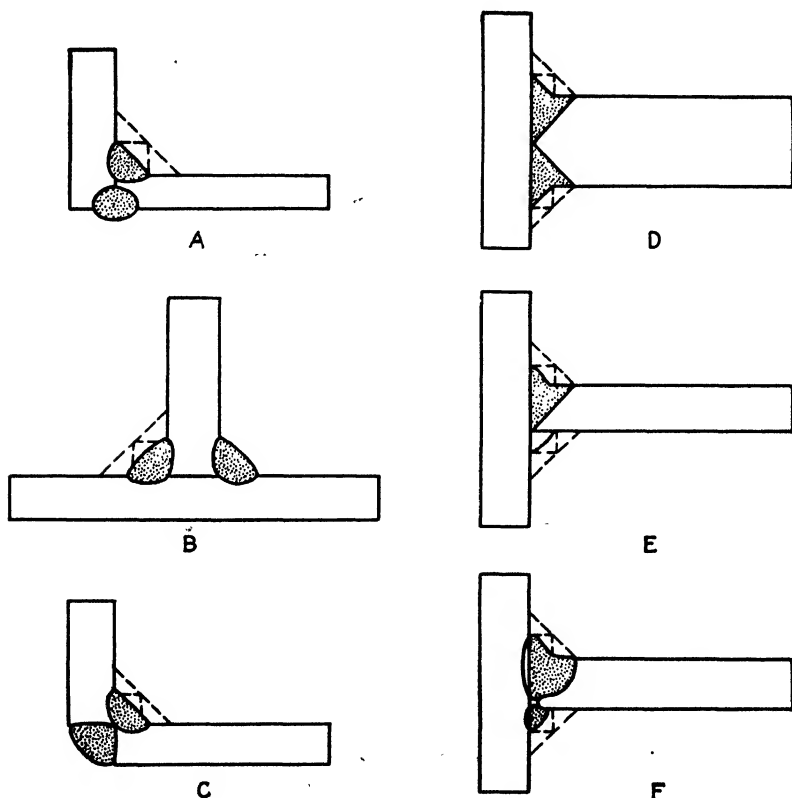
These fillet type joints may easily be overwelded to the extent shown by the dotted lines. Such overwelding should be discouraged by inspectors as much as underwelding, since it is expensive and often weakens the joint by grain growth and stress concentration.
